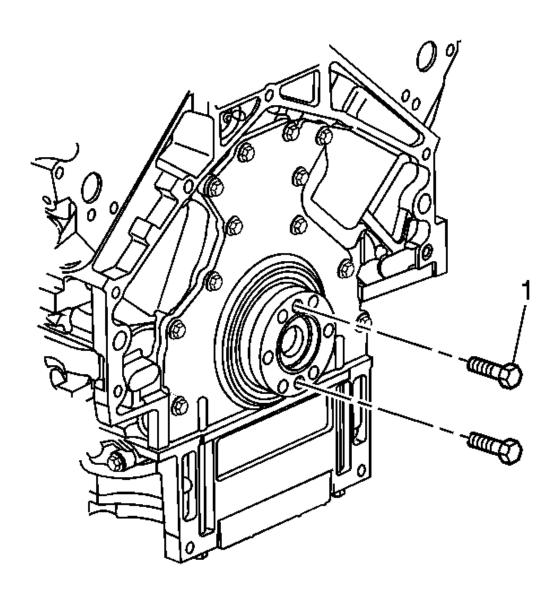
View Of Bolts & Spacer Courtesy of GENERAL MOTORS CORP.
